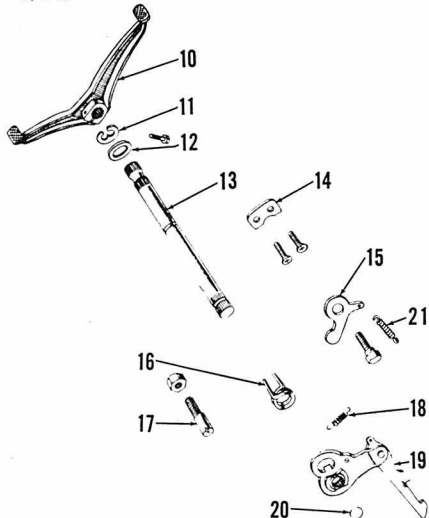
Exploded view of gear shift linkage. Lever (19) turns selector drum (3—Fig. K1-15) by catching pins (2).
